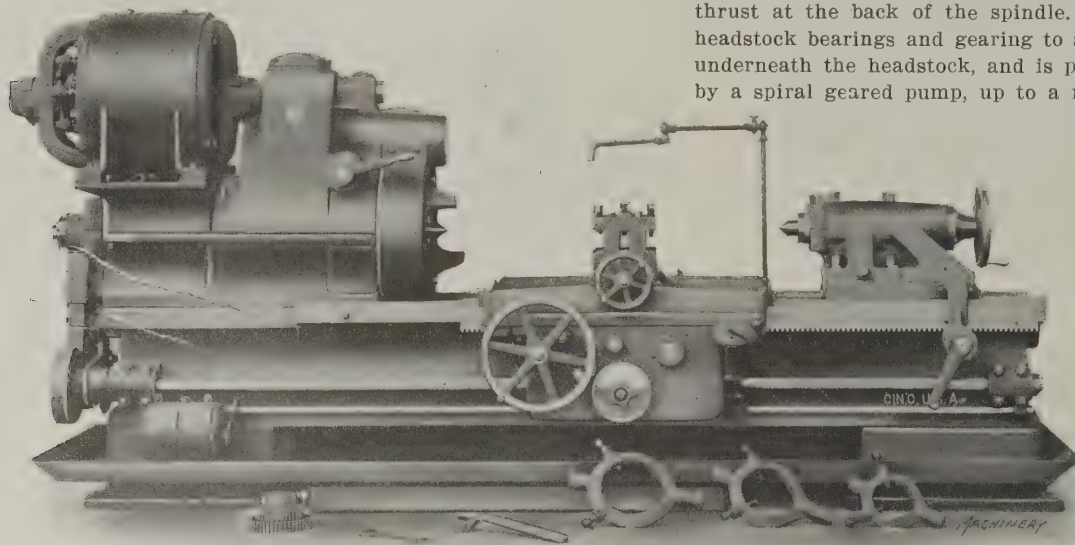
Powerful Motor driven Lathe built by Lodge & Shipley
